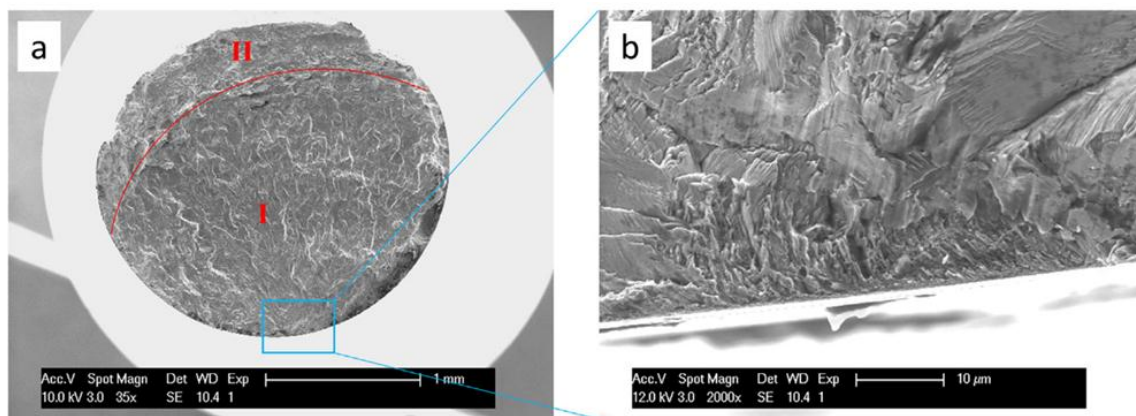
Fracture surfaces of a machined sample [$\sigma_a = 350$ MPa, 254980 cycles] (a) (b) (Elangeswaran *et al.*, 2019)
